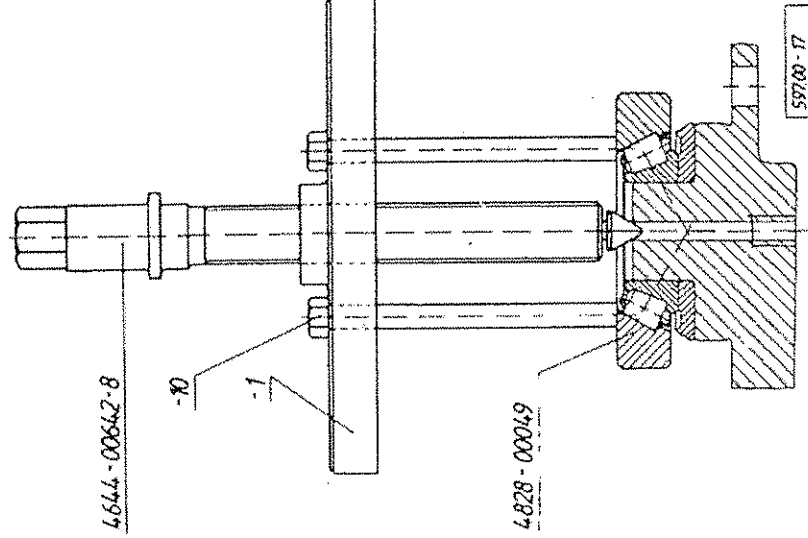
PULLING OUT THE INNER PORT OF THE
